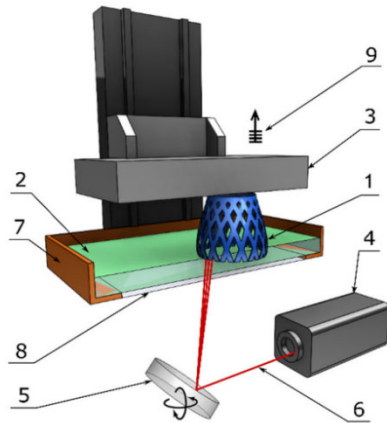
Components of an SLA machine: (1) Printed part, (2) Liquid resin, (3) Build platform, (4) UV laser source, (5) XY scanning mirror, (6) Laser beam, (7) Resin tank, (8) Window, and (9) Layer-by-layer elevation. (Redwood et al., 2017).
